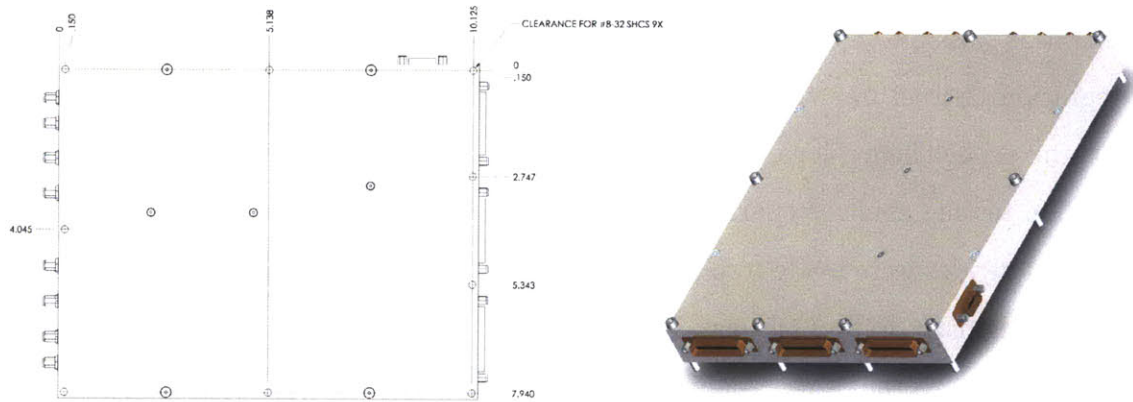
Machinist drawing (left) and solid model (right) of the TDC
